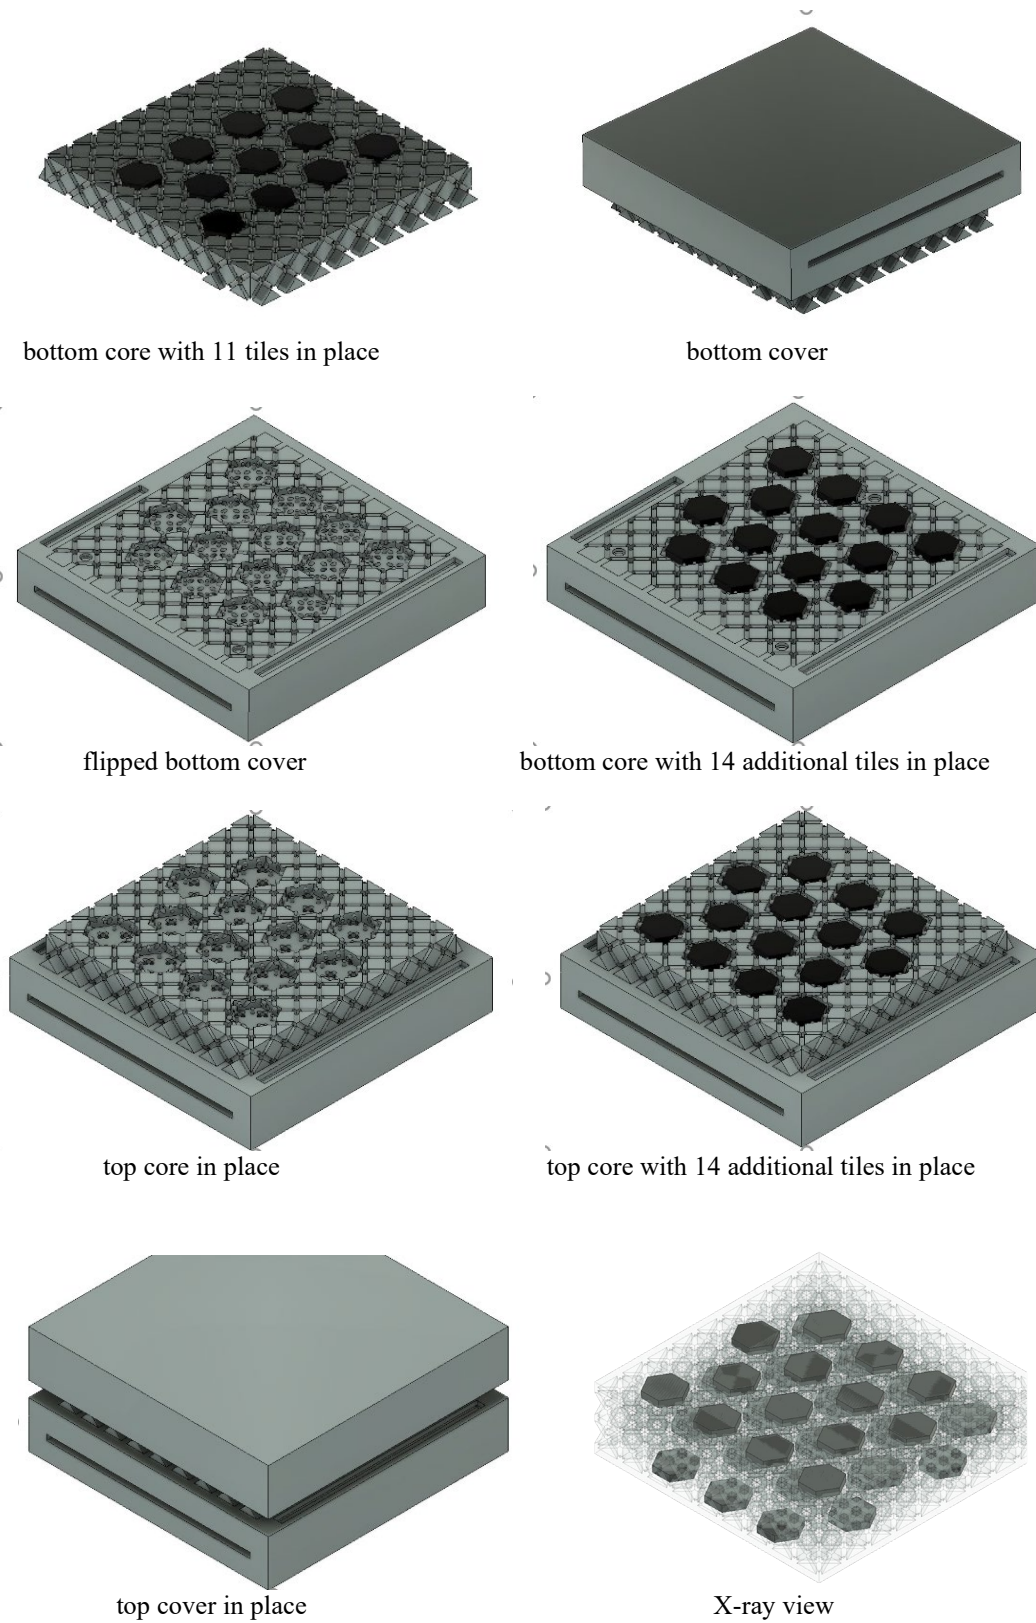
The 3D printed core package assembly sequence for producing a lattice structure mold with thirty-nine (39) embedded tiles.
